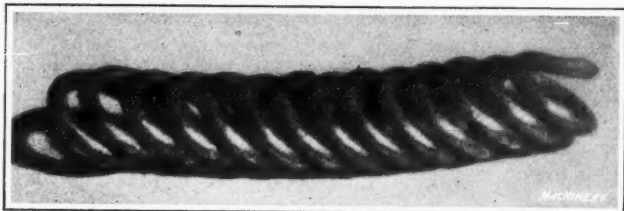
Graphic Illustration of Movement of Torch when welding Steel
